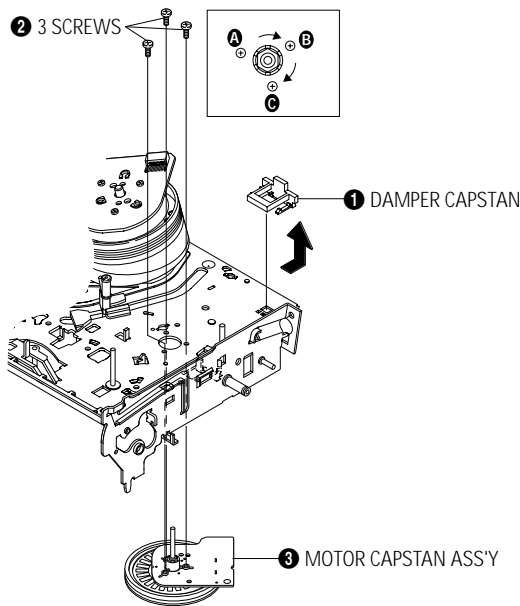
Damper Capstan, Motor Capstan Ass'y Removal
